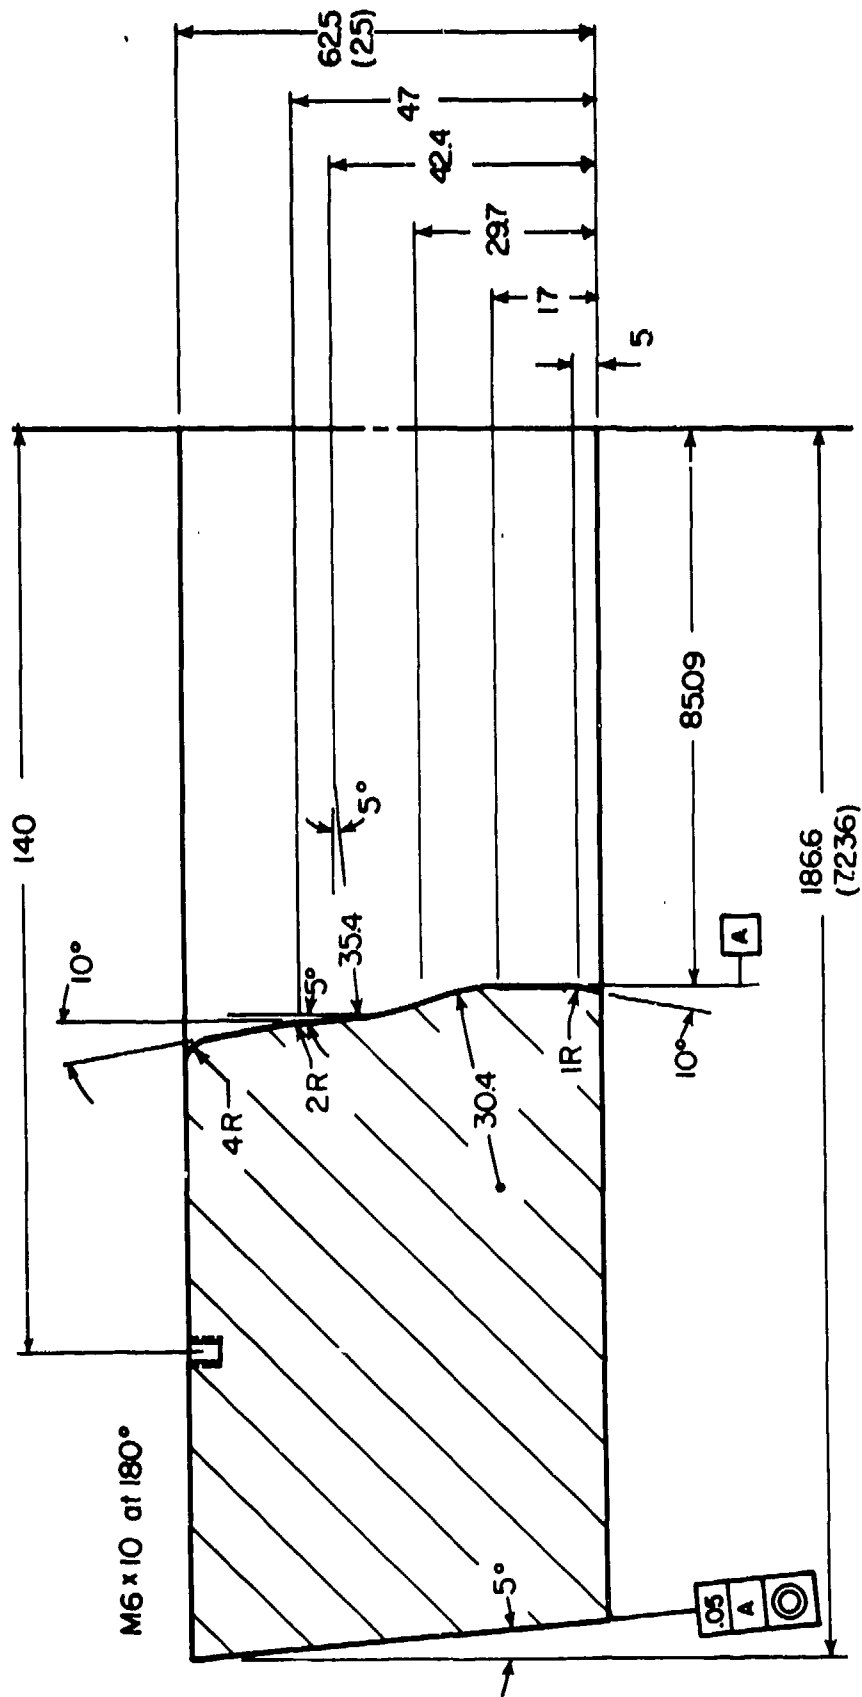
Double curvature die shape for hot drawing of M107 shell (first draw operation).
